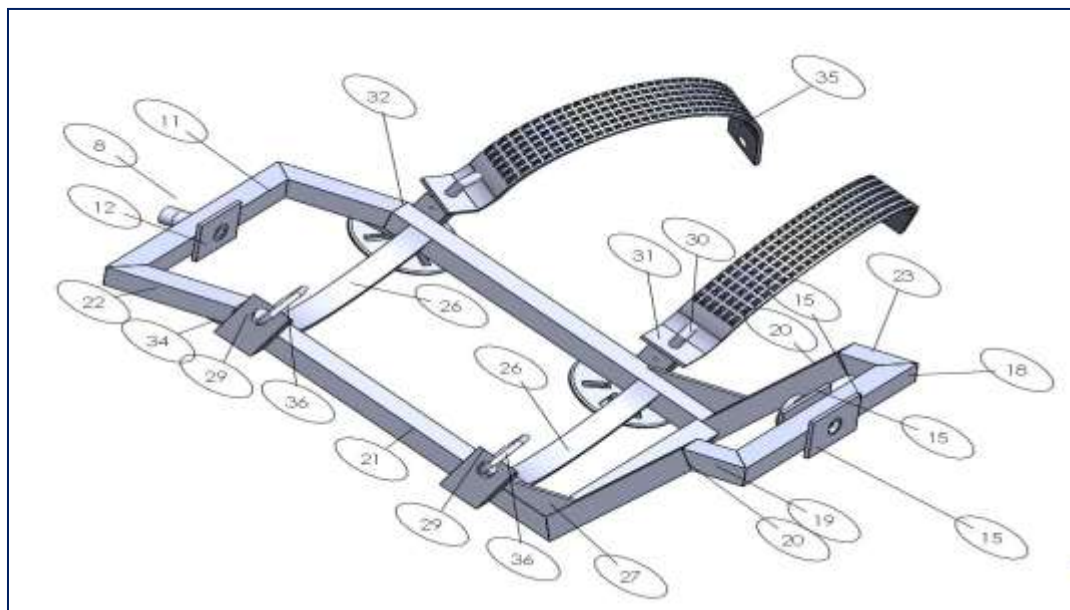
Part identification numbering on the rotary unit subassembly of the agitator
